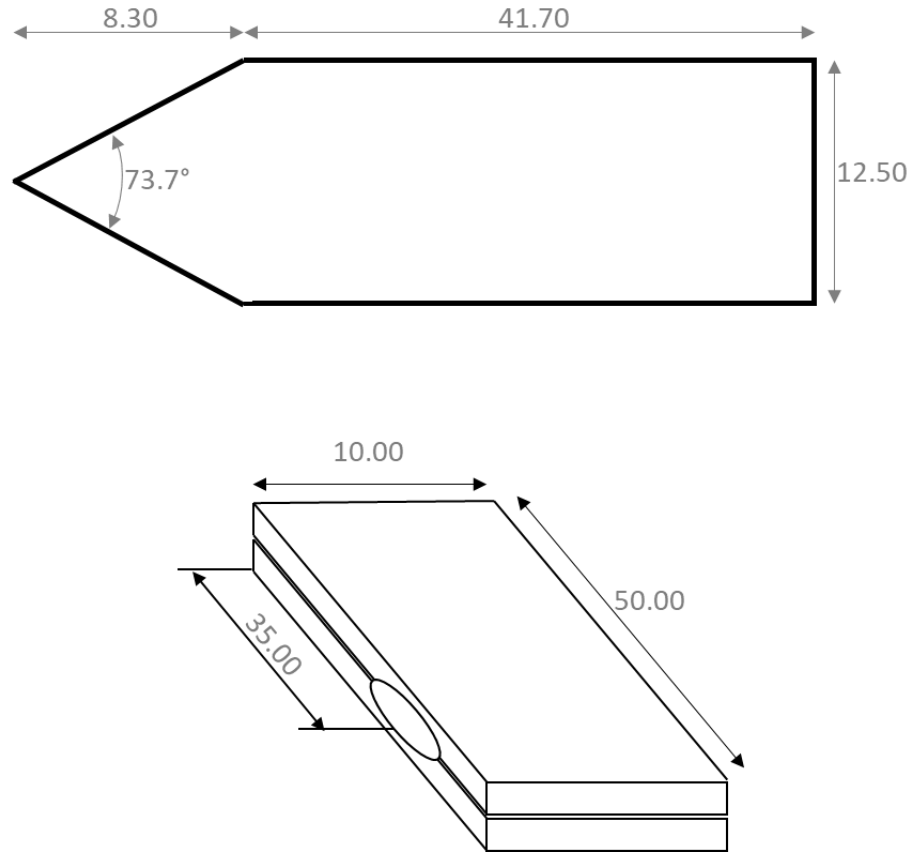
Dimensions of the wedge and sample in single-sided wedge test
